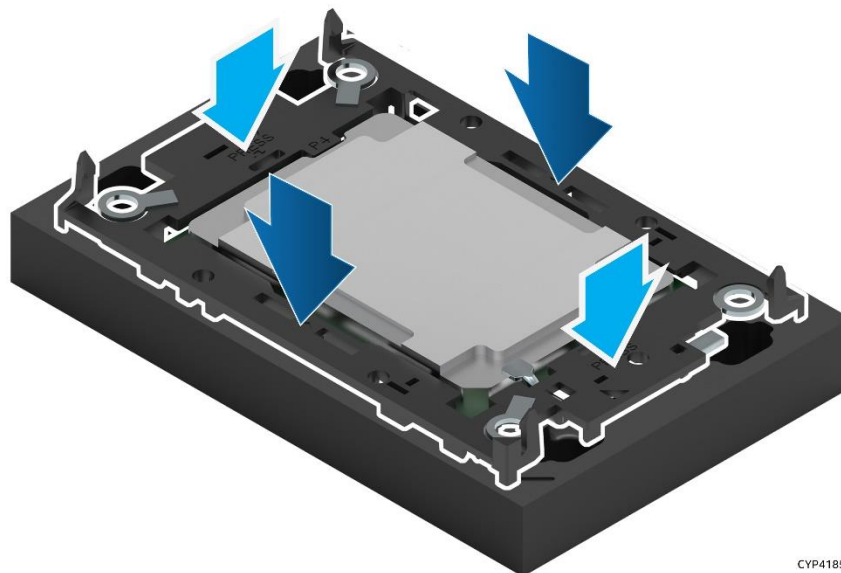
Installing Processor Carrier Clip onto Processor – Part 2
